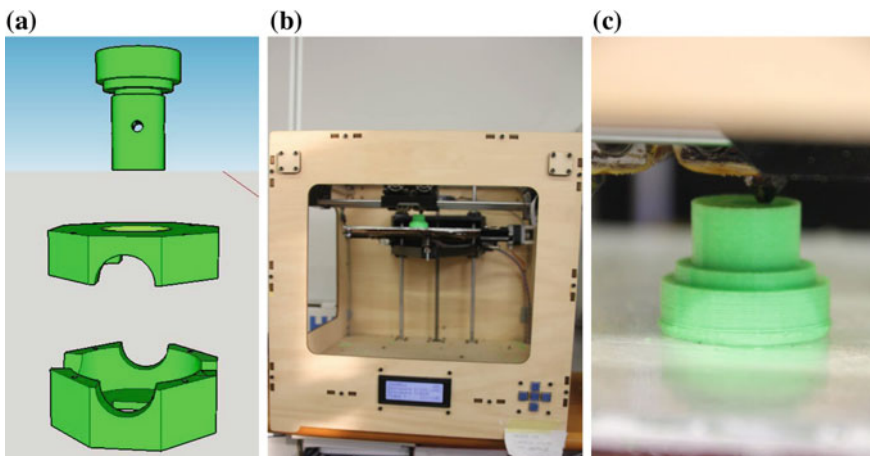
a Design of the chamber. b Sharebot Pro printer. c Printing of the gas dispenser
